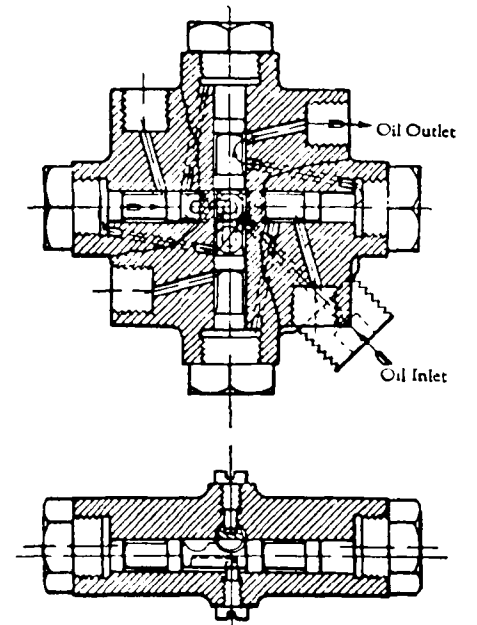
Sectional drawings of the Metcalfe Oil Divider.
